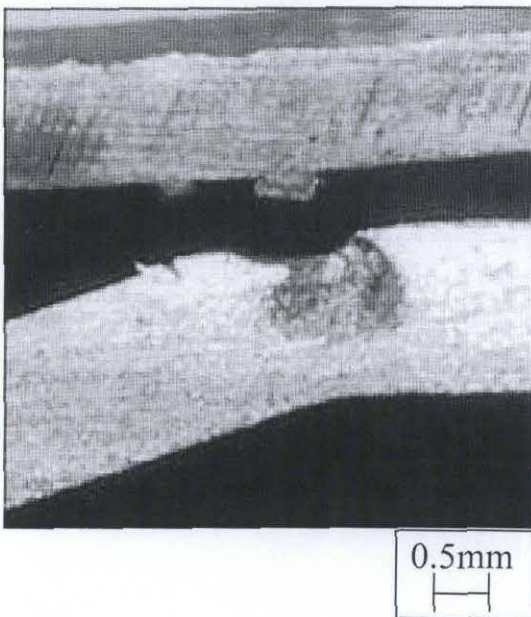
Tensile shear test specimens after testing of SPCC/A1050.
